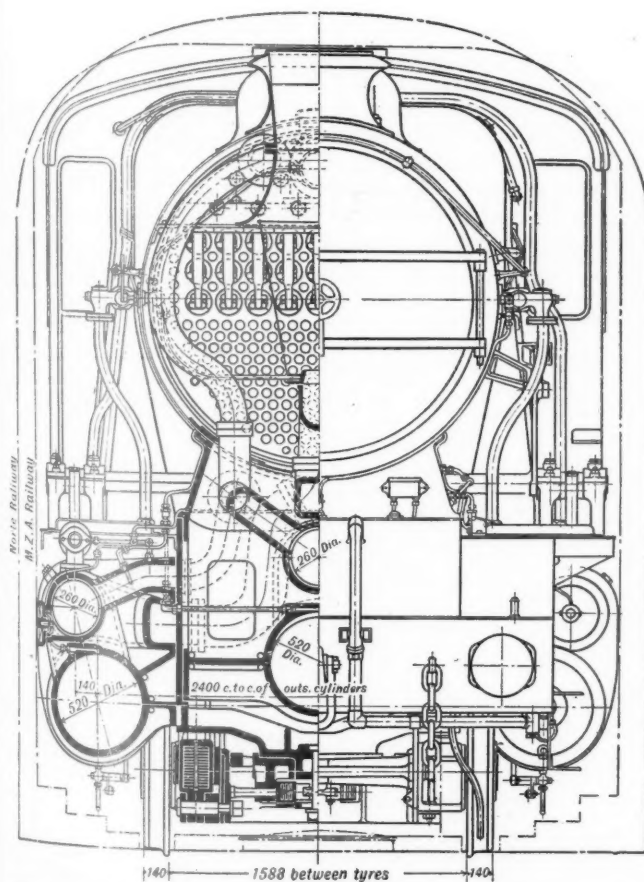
SECTION AT CYLINDERS AND HALF-FRONT VIEW
